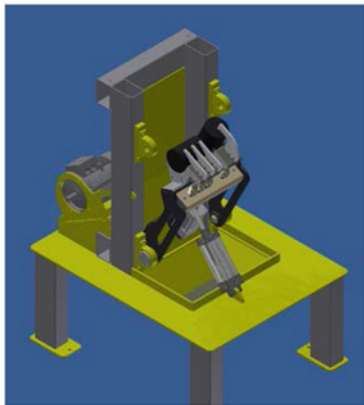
The sample preparation machine for making the FBD specimens. The machine is built into and completely covered in a safety box with outlet for suction of carbon dust.
